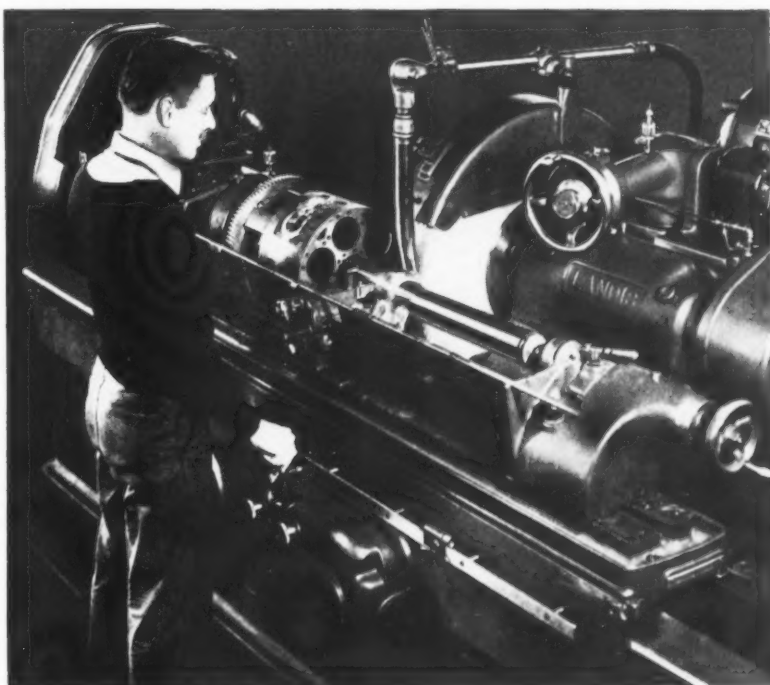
Grinding a Shaft to a Tolerance of 0.0003
